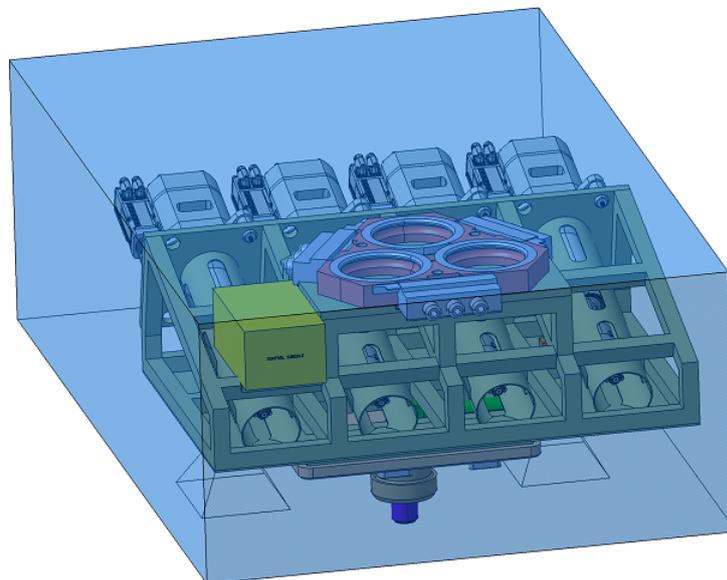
TSR concept design inside the Storage Box volume (2100x1310x665), Tool Changer Tool Side positioned in the midplane of the Storage Box, as prescribed in section 4.2.21
